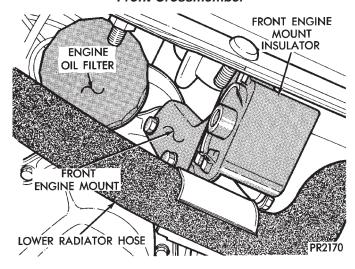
Remove or Install Front Mount Insulator Through-Bolt and Bell Housing Bolts
